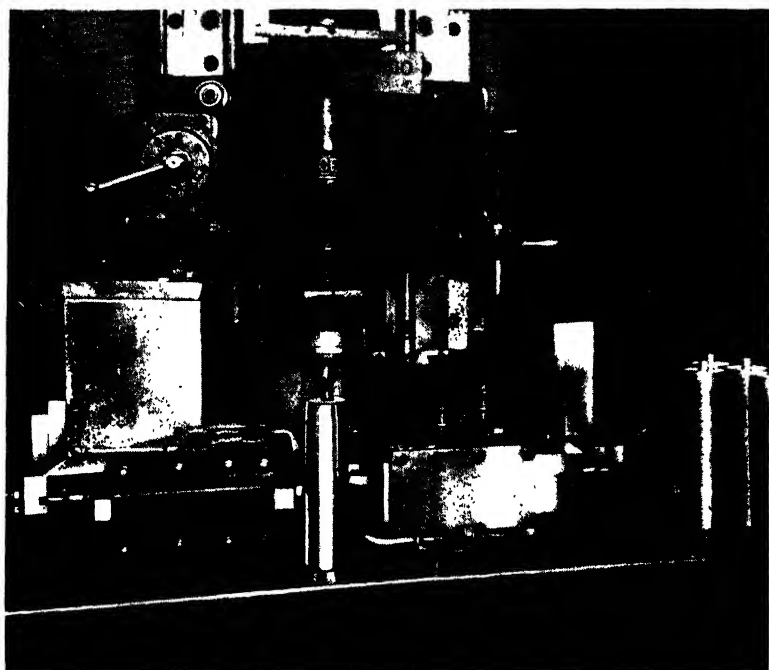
Multiple-head Machine that Simultaneously Performs Various Operations on the Two Spark-plug Holes in Aluminum Cylinder Heads
